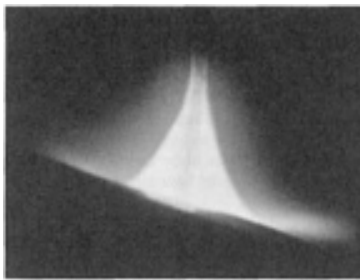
HIGH-SPEED PHOTOGRAPH OF STREAMING TRANSFER MODE IN GAS-METAL ARC WELDING OF STEEL
